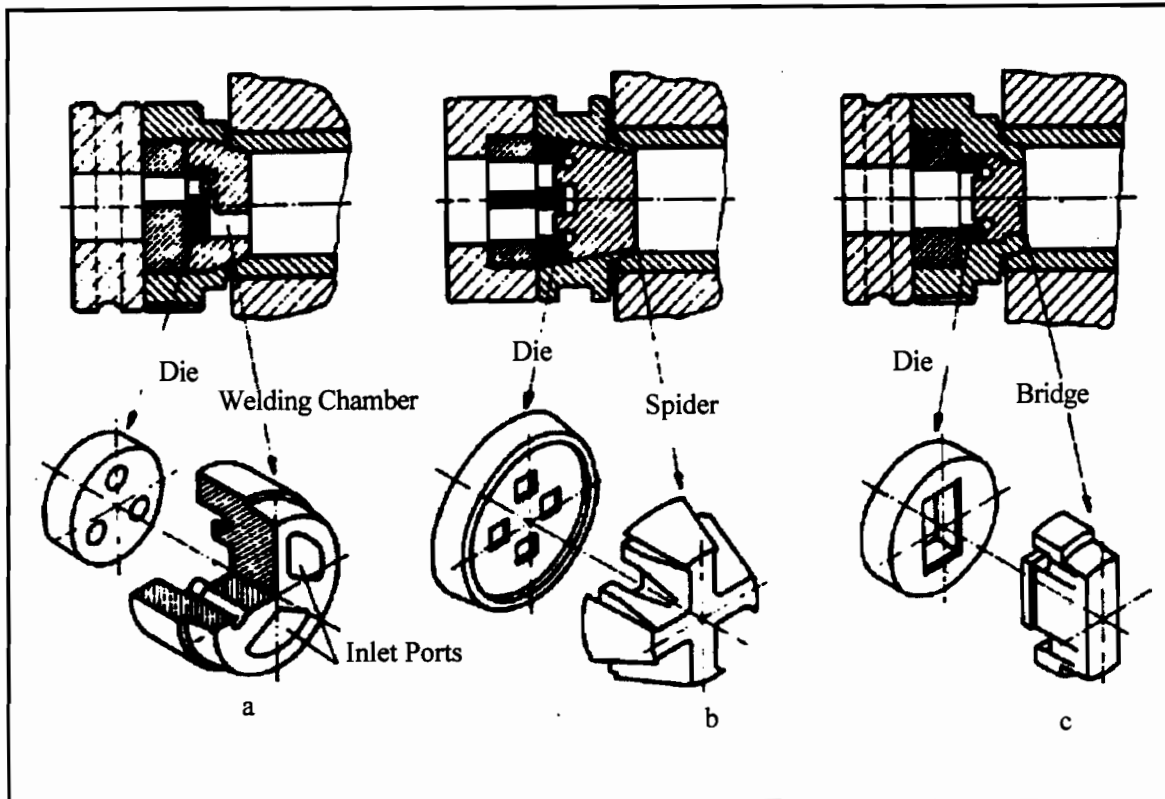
Construction of extrusion dies for the welding chamber process used for aluminum, a) multihole porthole die, b) multihole spider die, c) bridge die [Laue, K., et al., 1981].
